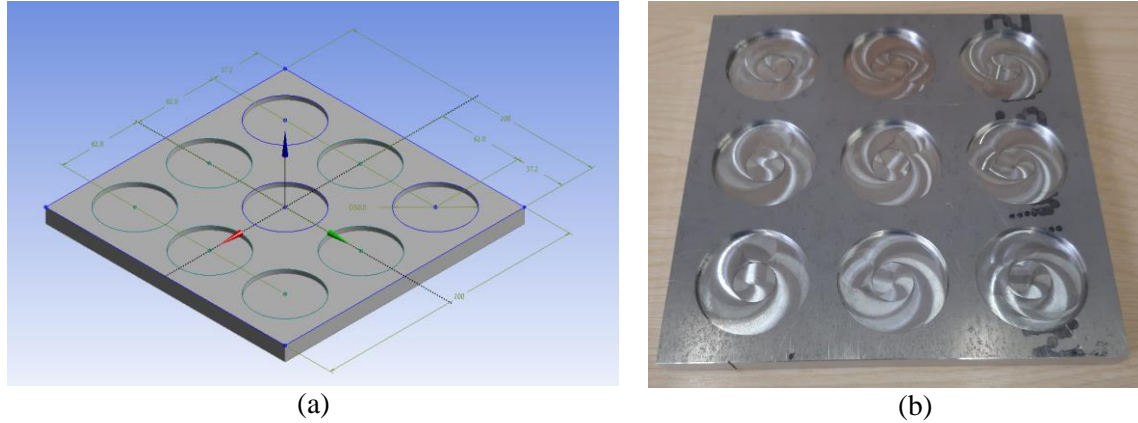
(a) CAD model of water absorption mould, (b) Aluminium mould made from CNC machining.
